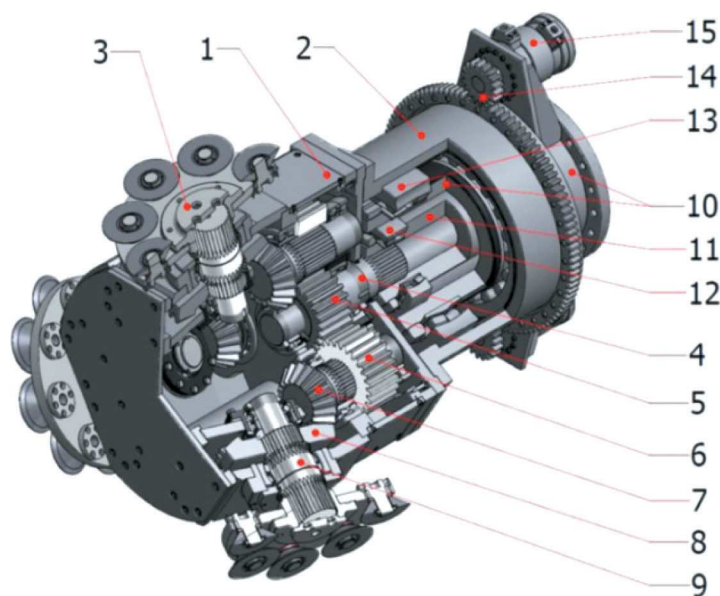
Model of new head solution with disc tool of complex trajectory [3]: 1 – main gear, 2 – auxiliary gear, 3 – disc plate, 4 – input shaft, 5 – central gear wheel, 6 – orbital gear wheel, 7 – pinion, 8 – face gear, 9 – output shaft, 10 – support, 11 – connector, 12 and 13 – bearings, 14 – body gear, 15 – hydraulic engine
